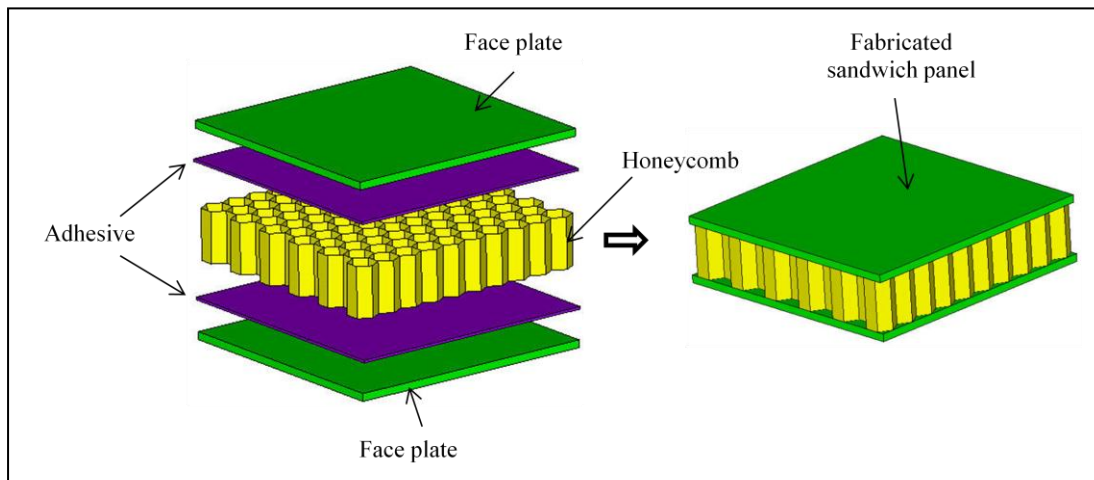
Typical configuration of a honeycomb sandwich panel
